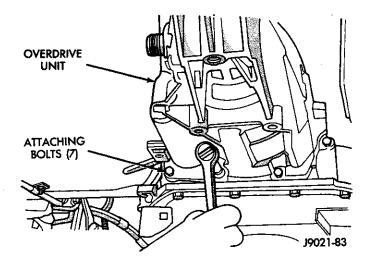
Removing/Installing Overdrive Unit Attaching Bolts
